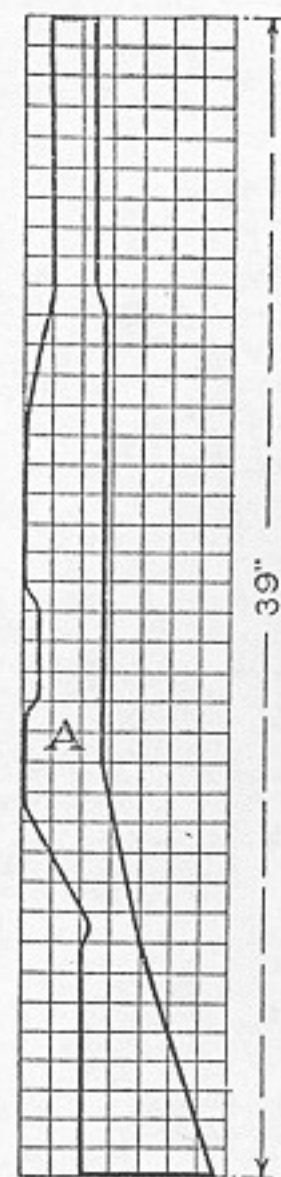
Pattern of Stock and Barrel of Drill Gun shown in Fig. 452
